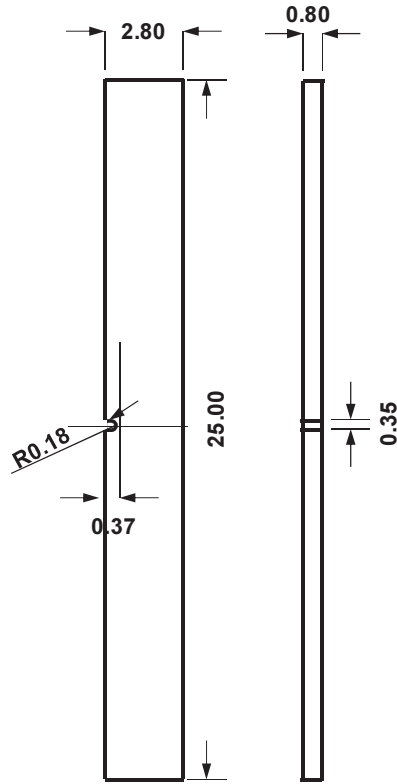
Single edge notch specimen used for *in situ* experiments (dimensions are in mm)
